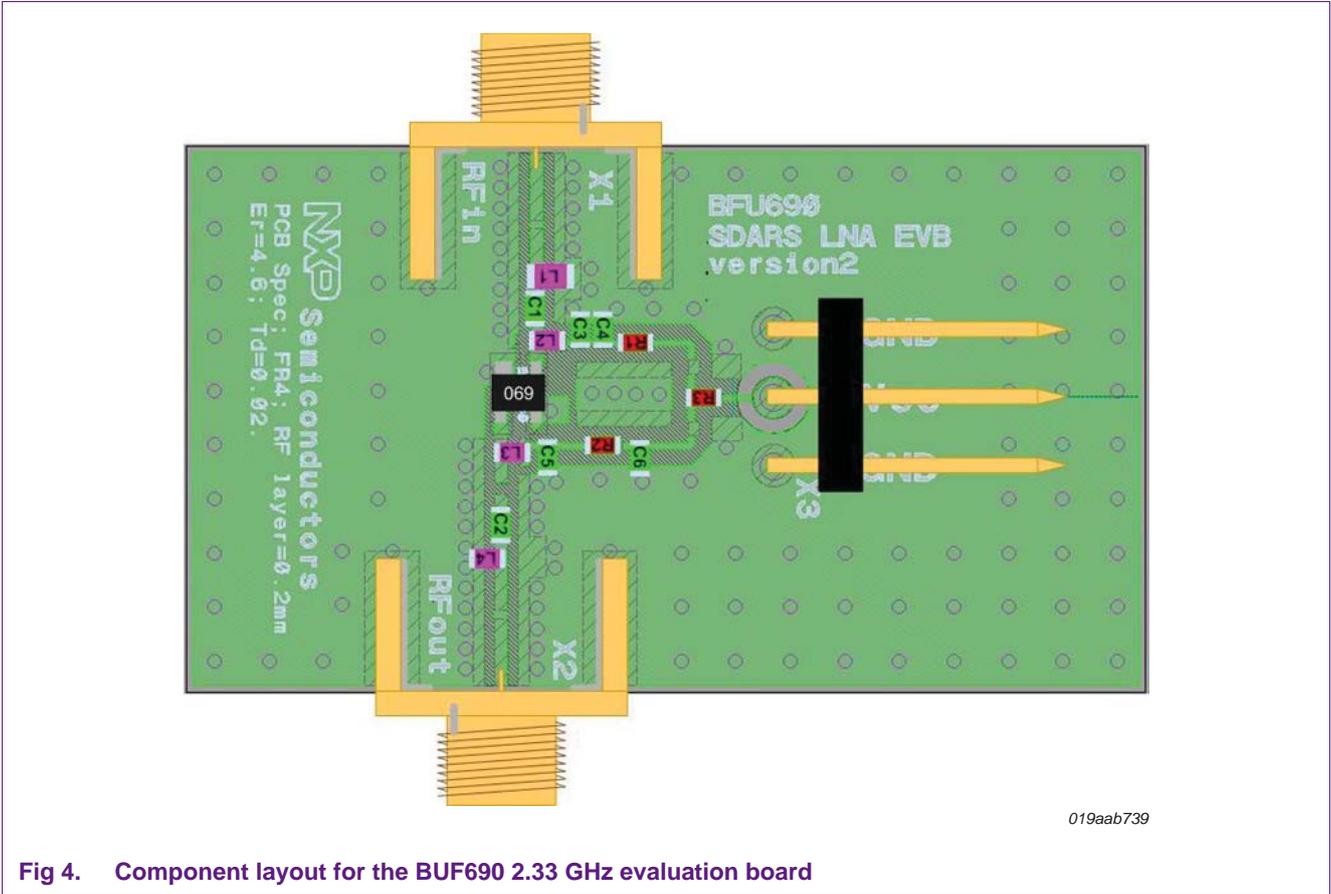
Component layout for the BUF690 2.33 GHz evaluation board
